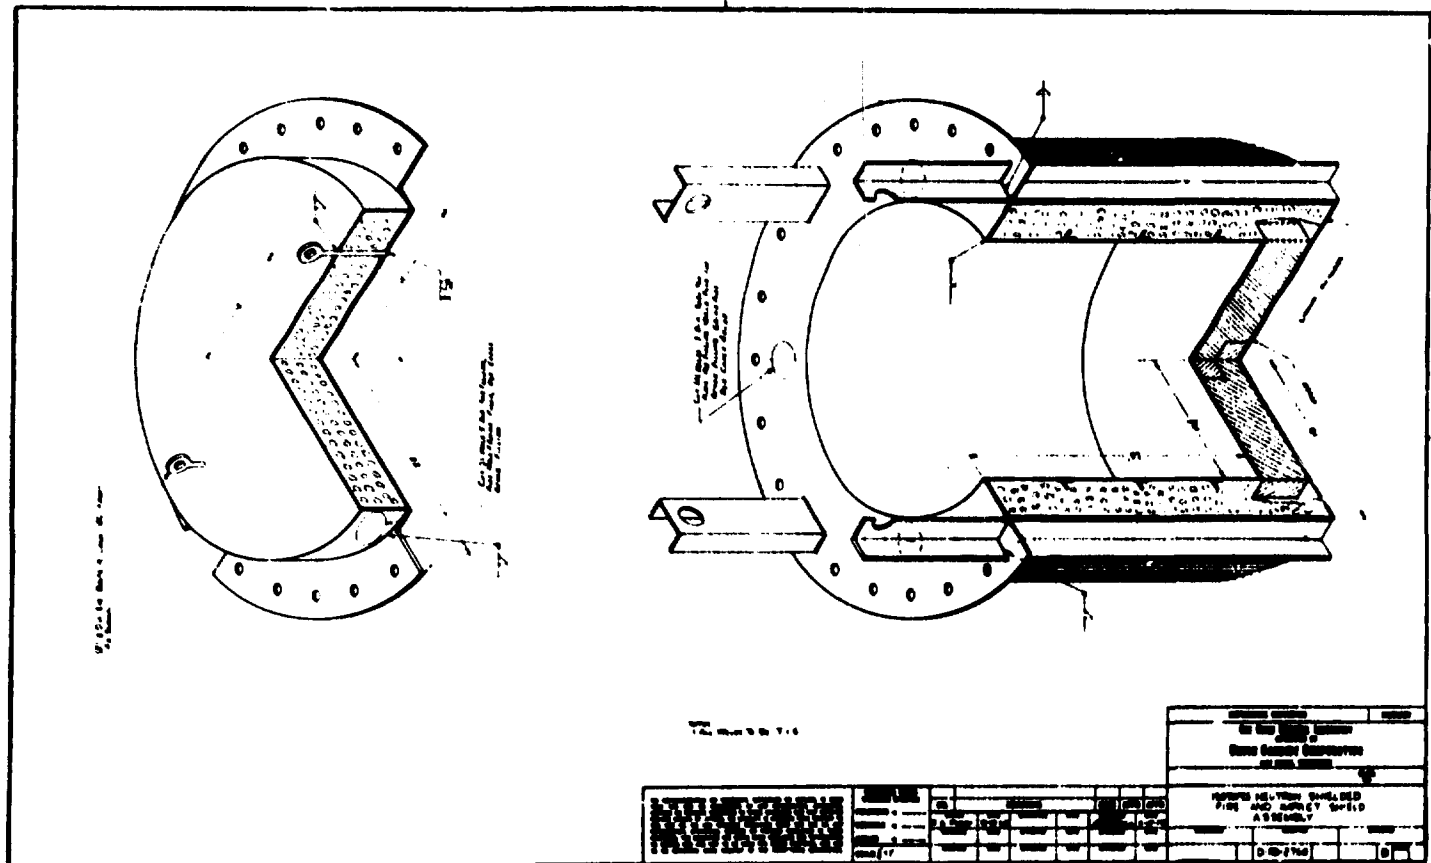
Fabrication Drawing no. D-RD-2760.
